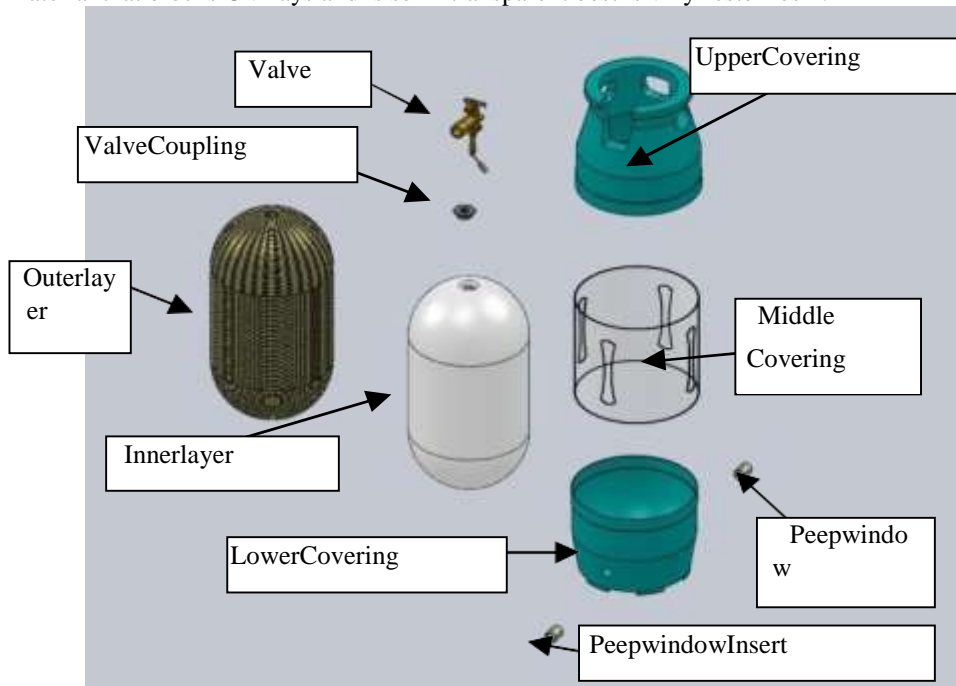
Designed FRP LPG cylinder. Exploded view of the Components
